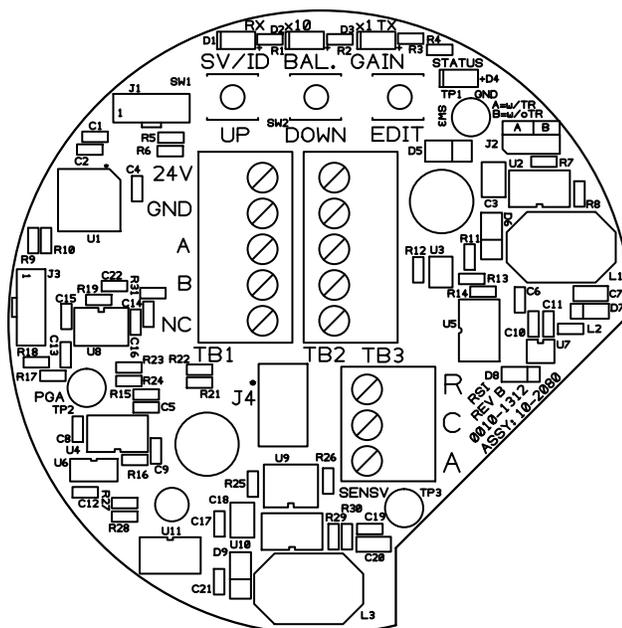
BFT 10-2080 Remote Sensor Option Board
